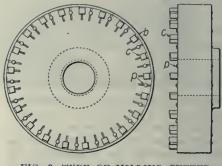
TYPE OF MILLING CUTTER EMPLOYED.
